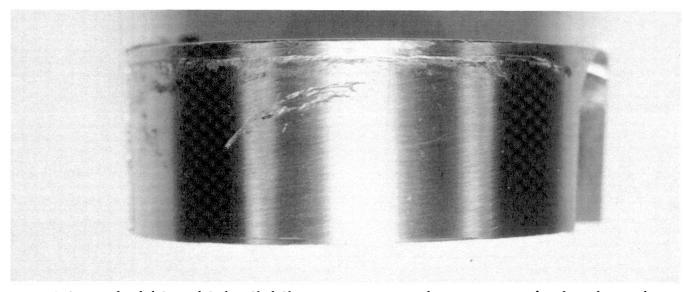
Section of Failed Tapered Turbine Shaft Showing Continuous Line of Fretting Wear at Edge of Coupling Land.
